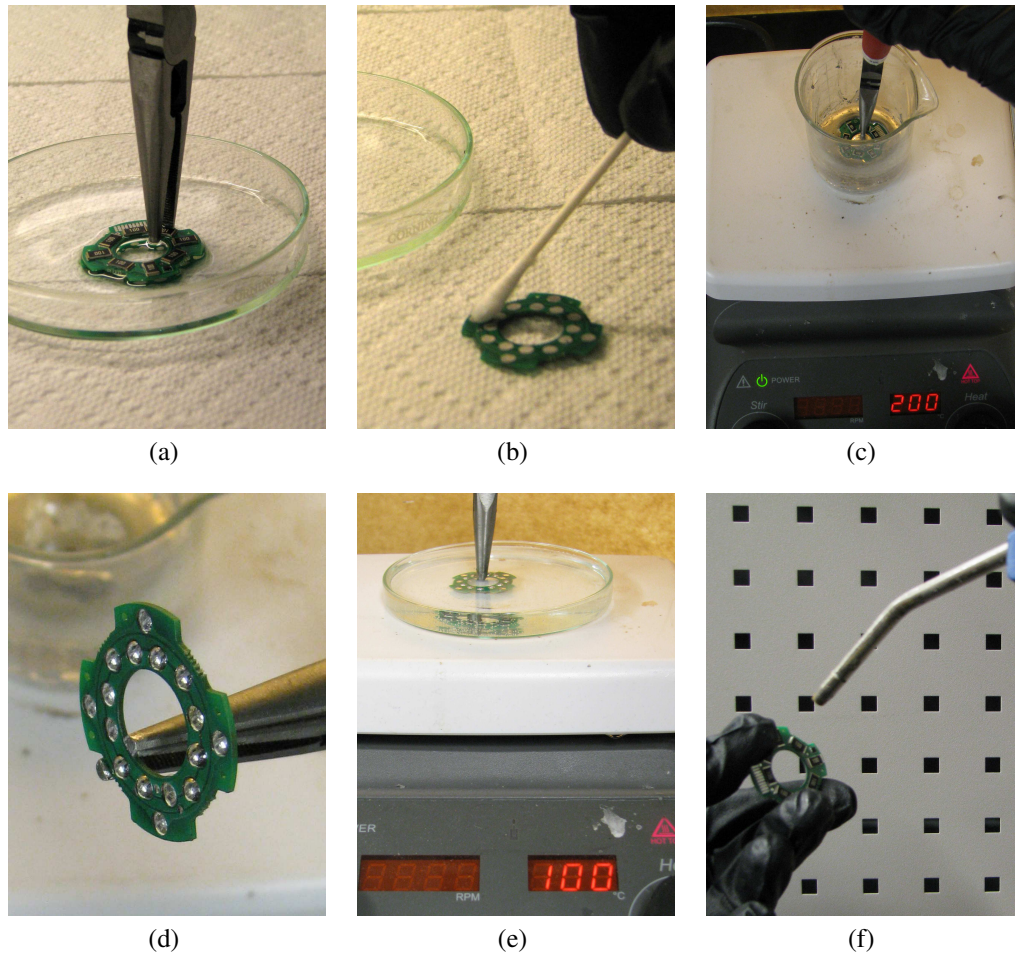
Photographs of process steps for applying solder to the soldering connector PCB. (a) Dipping tinned circuit board connector pads in flux. (b) Applying flux manually using a cotton swab. (c) Dipping the tinned pads in hot Field's Alloy. (d) PCB pads after Field's Alloy application. (e) Washing off of flux in warm water. (f) Air drying of PCB.
